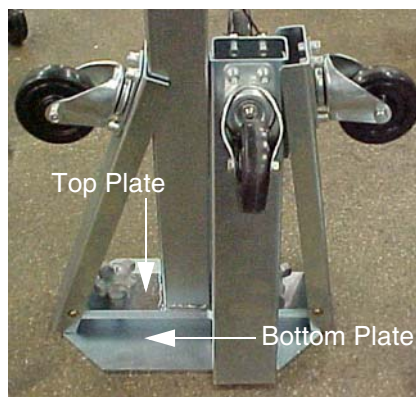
Redesigned Front Cover Dolly Base Assembly
